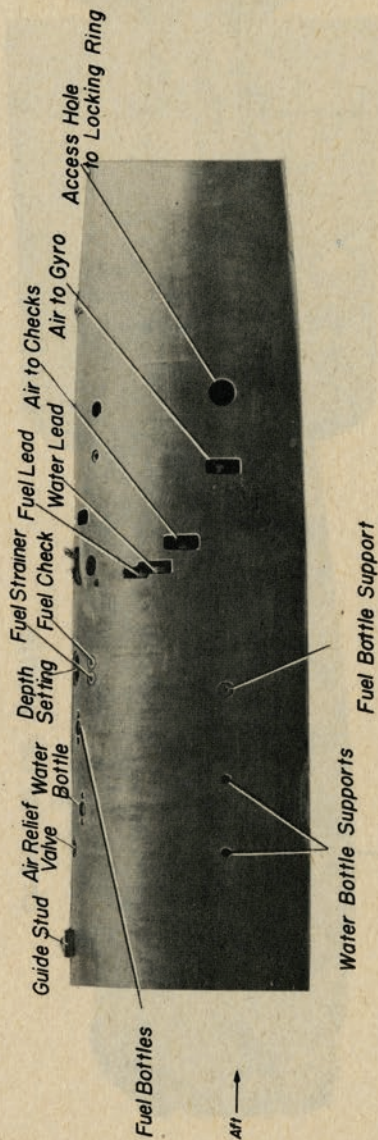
Torpedo Type 2 (Special), Flask Section, Port View
